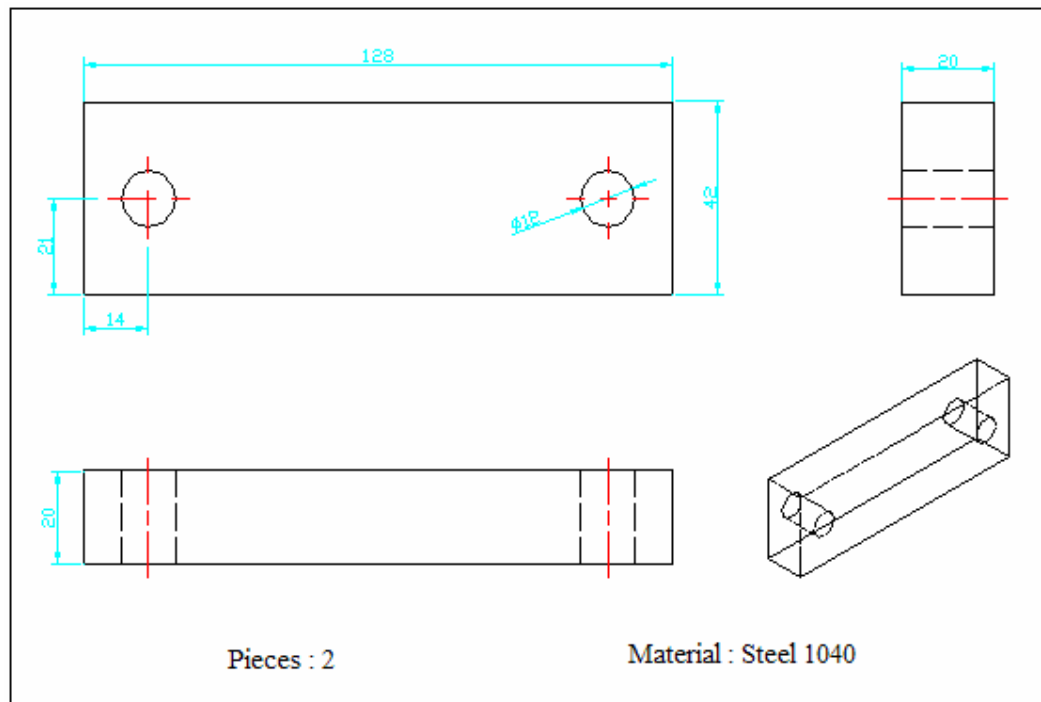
Technical drawing of rear plate of the squeeze casting die
